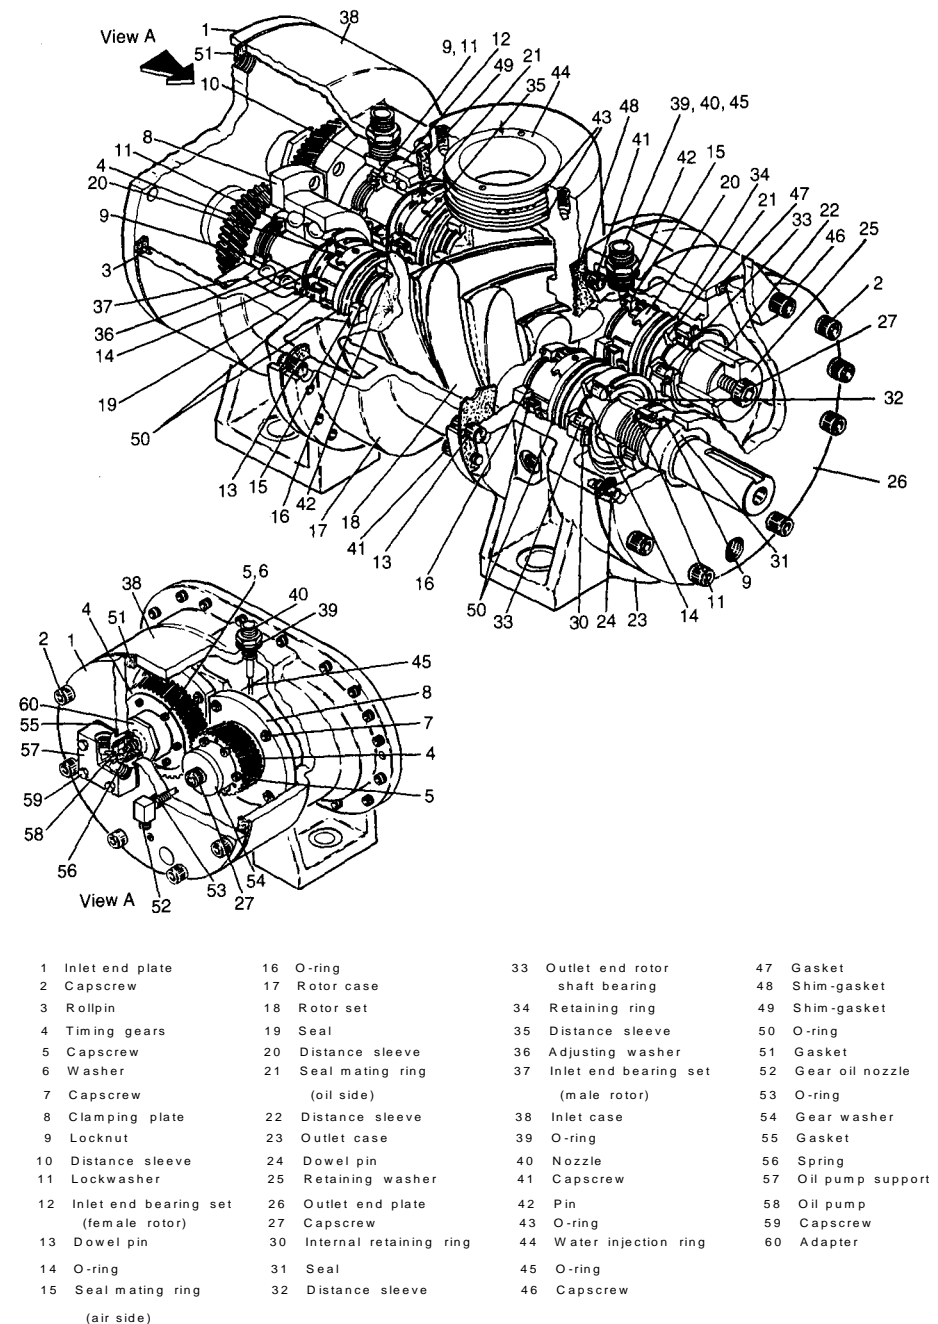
Twin-screw compressor. Courtesy Dresser-Rand.
